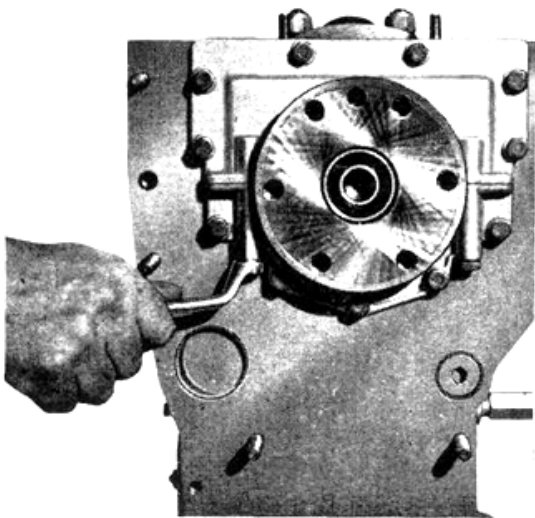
Tightening Oil Seal Housing Securing Setscrews
